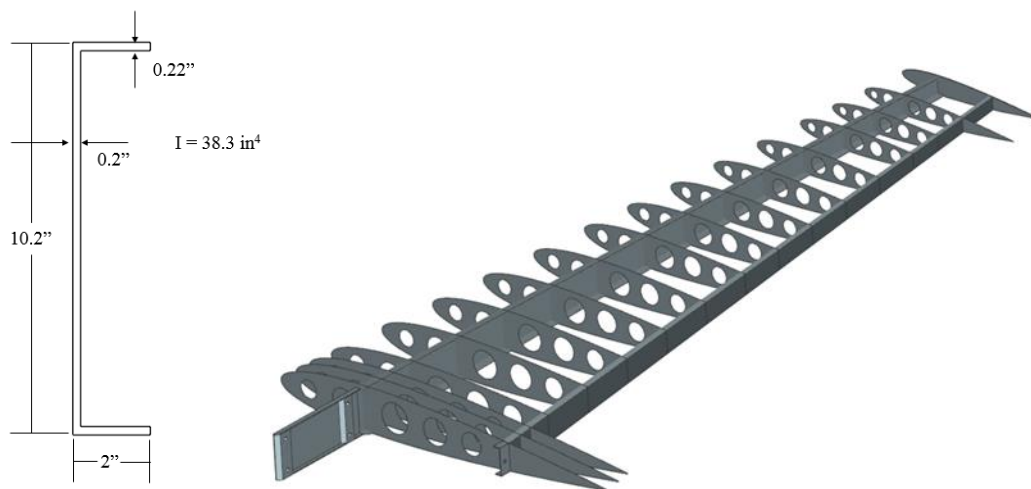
Wing Structure and Main Spar Root Cross Section
